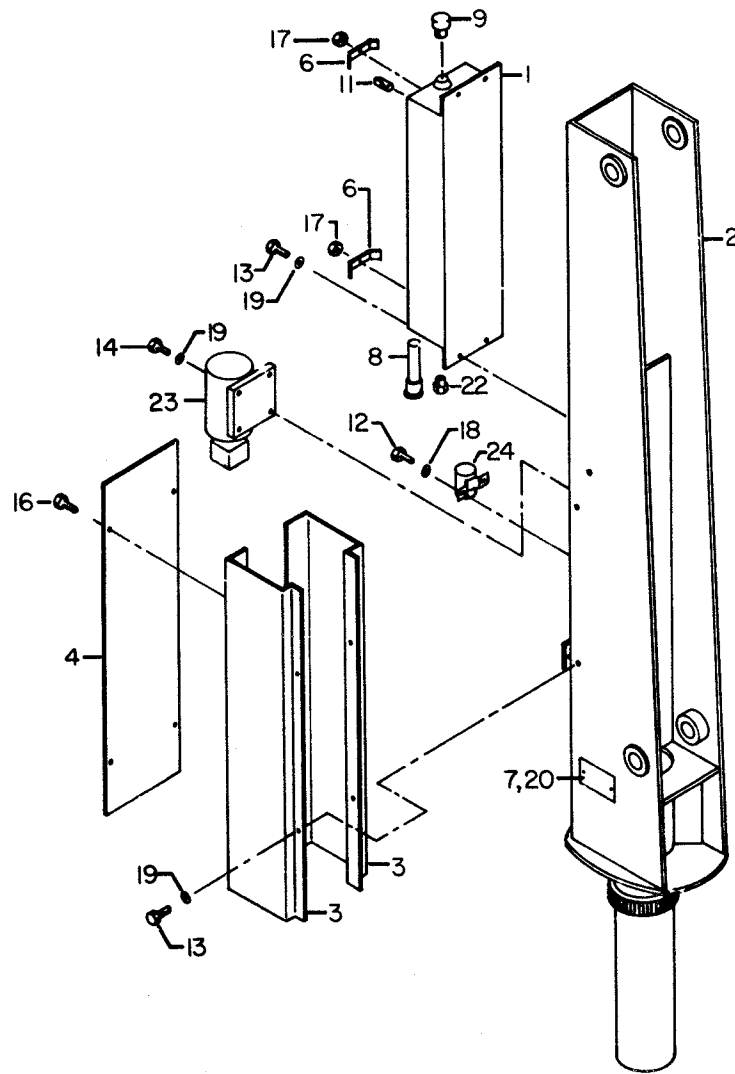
BASE ASSEMBLY - 250° ROTATION (41070309)
